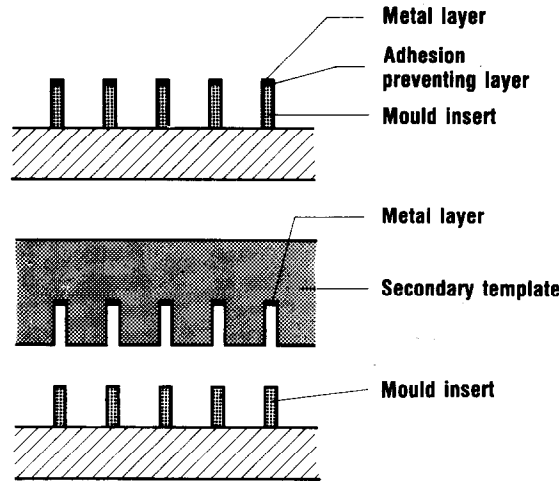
Fabrication of a plating base by transfer of a metal layer from the outer surface of the mould insert to the bottom of the secondary template.
